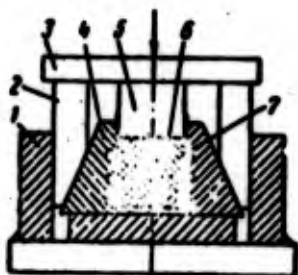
Forming of corrugations by rubber: 1 - base of the stamp; 2 - wedges; 3 - upper plate; 4 - split die; 5 - punch; 6 - rubber; 7 - bellows.
